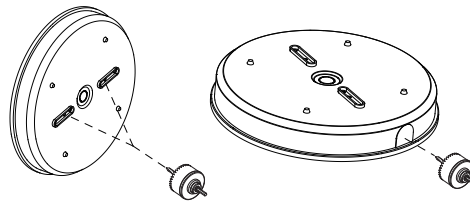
, Remove cover and gear tray and drill out relevant cable entry point.
